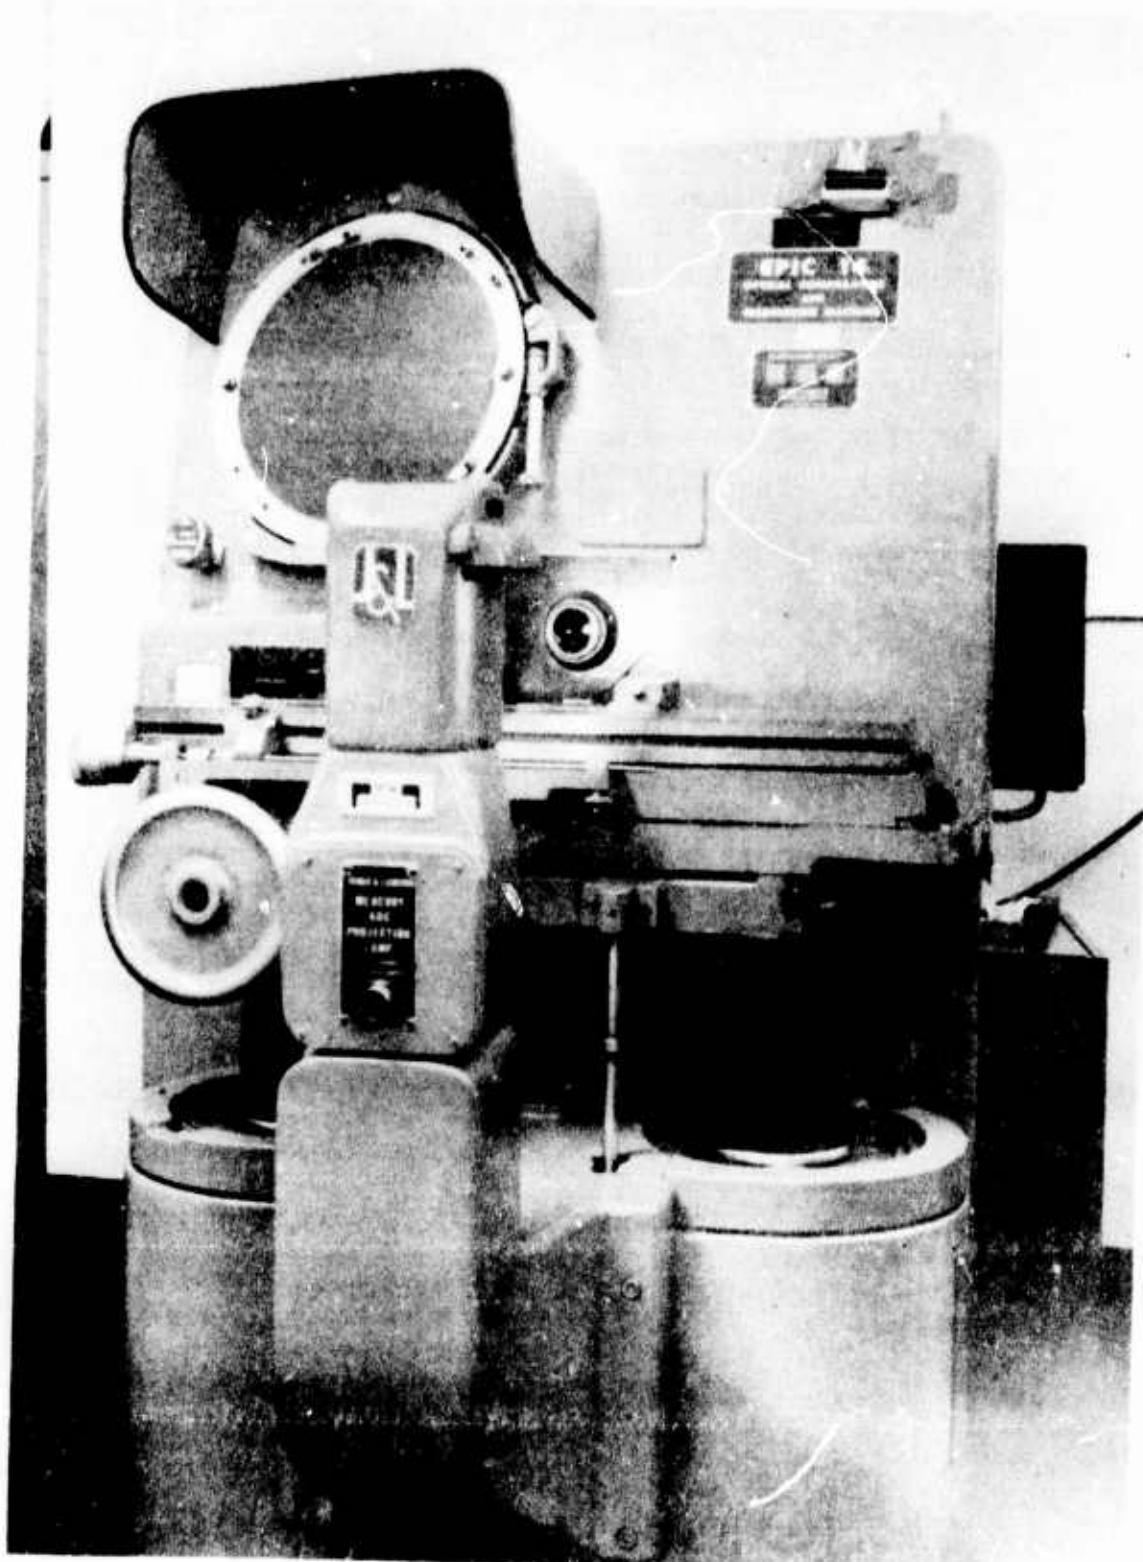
J and I. Optical Comparator Used to Check Pitch and Flank Angles of Samples 11 thru 17
